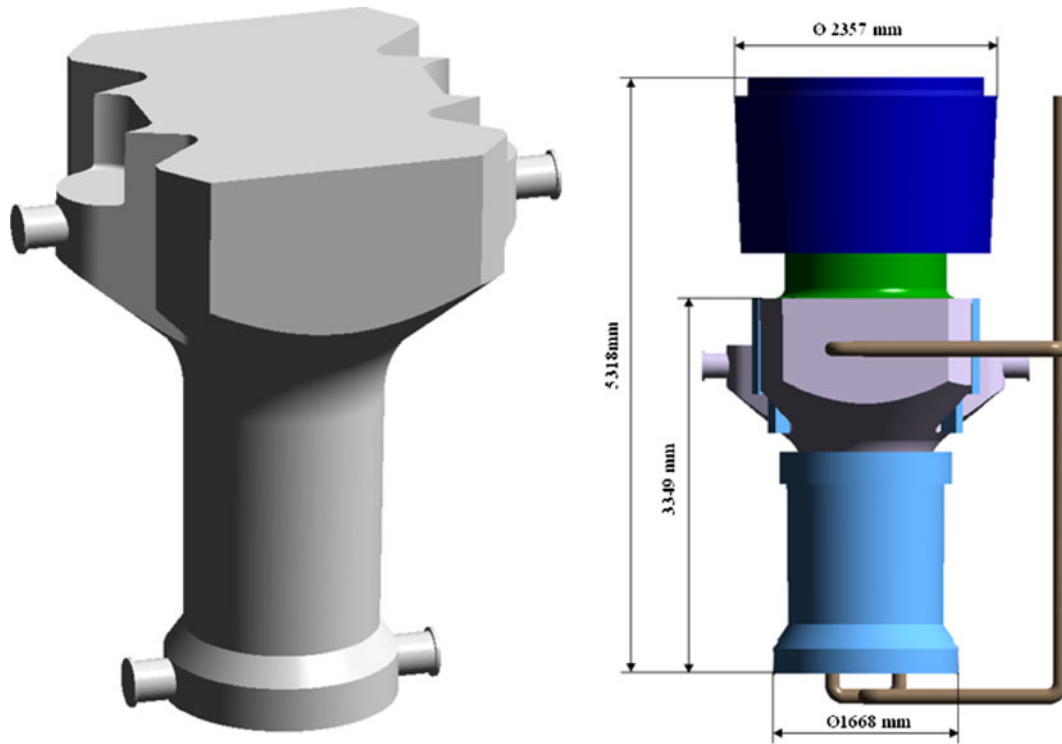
Three-dimensional computer drawings of the forging ram casting of case study 2. Left panel: geometry of the machined forging ram; right panel: casting with rigging (light purple: casting; light blue: chills; green: riser; dark blue: riser sleeve; brown: gating system).
